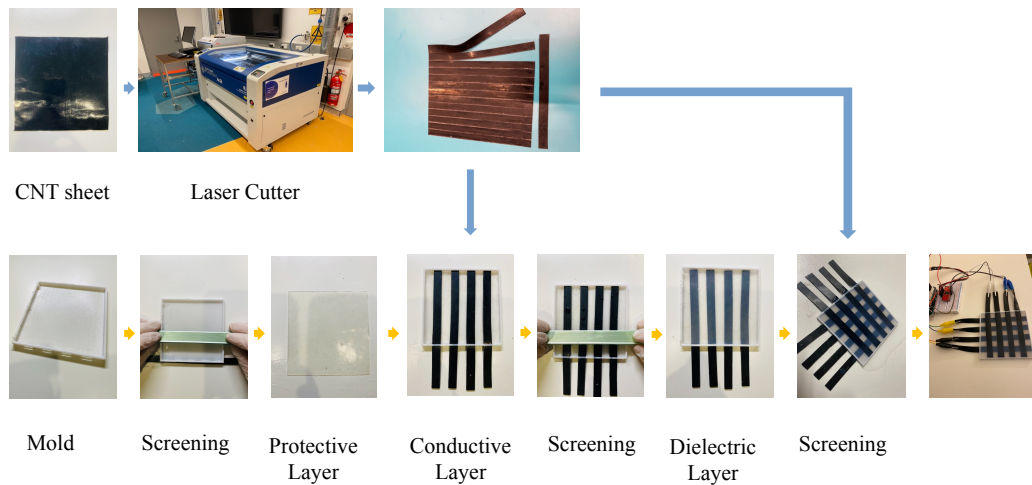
The fabrication of a soft sensor involves two pipelines: the upper one is for laser-cutting conductive layers and the lower one is for fabricating the multi-layer sensor.
